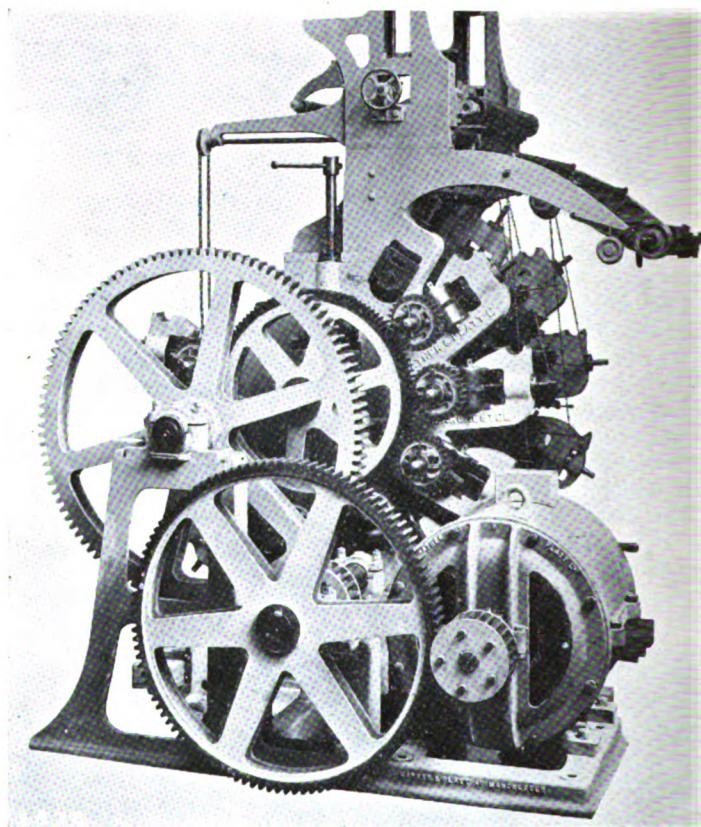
LARGE CALICO-PRINTING MACHINE, ELECTRICALLY-DRIVEN.
